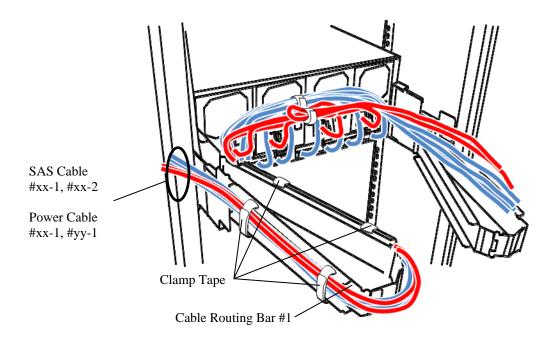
Removal of Clamp Tapes
